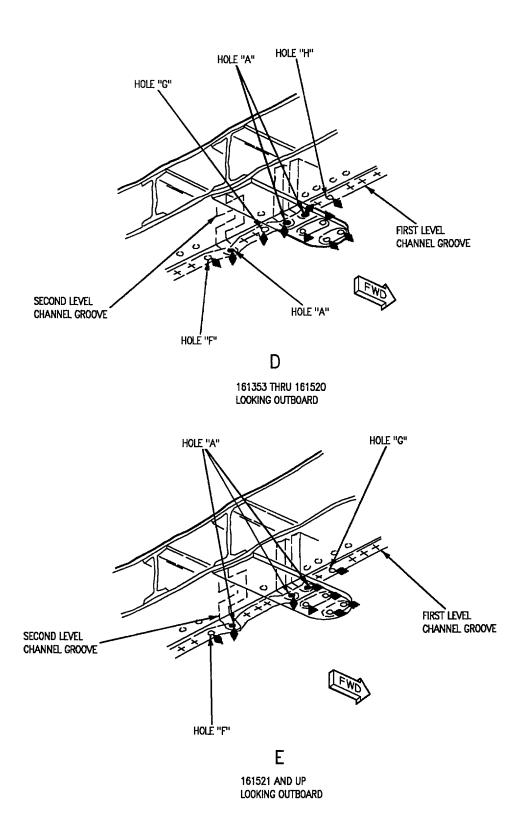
Rear Spar Channel Groove Seal Injection (Sheet 5)
